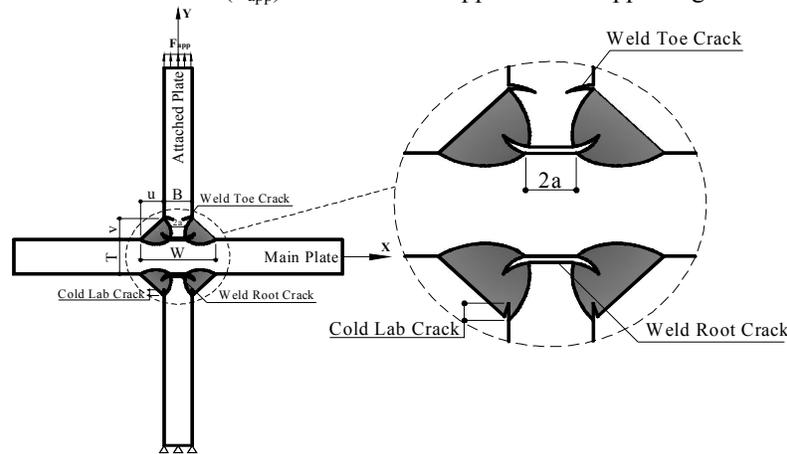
Model Description and Boundary Conditions of Load-Carrying Cruciform Welded Joint.
